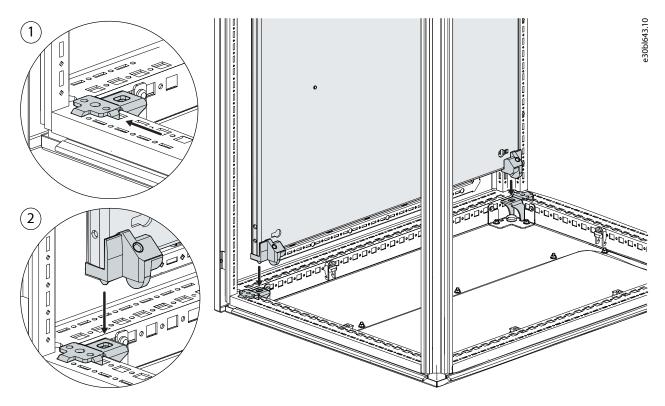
Rittal TS8 Cabinet - Installation of Mounting Brackets and Mounting Plate
